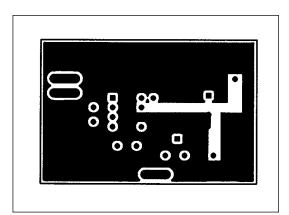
DIP PC Layout, Solder Side (1X Scale)
